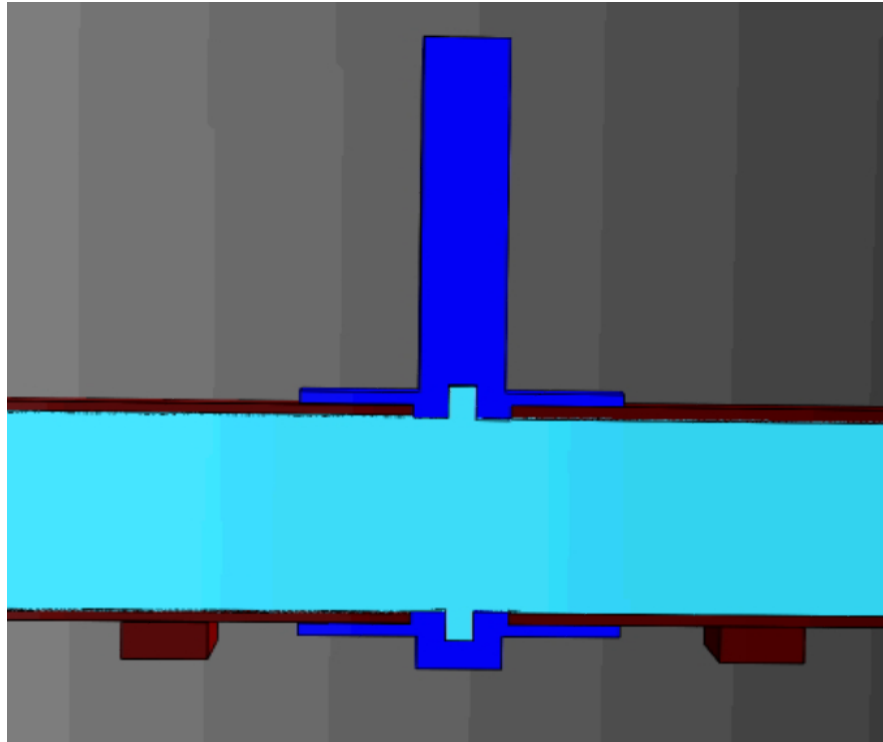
CAD drawing of the knife-valve used to initially separate the two fluid mixtures
